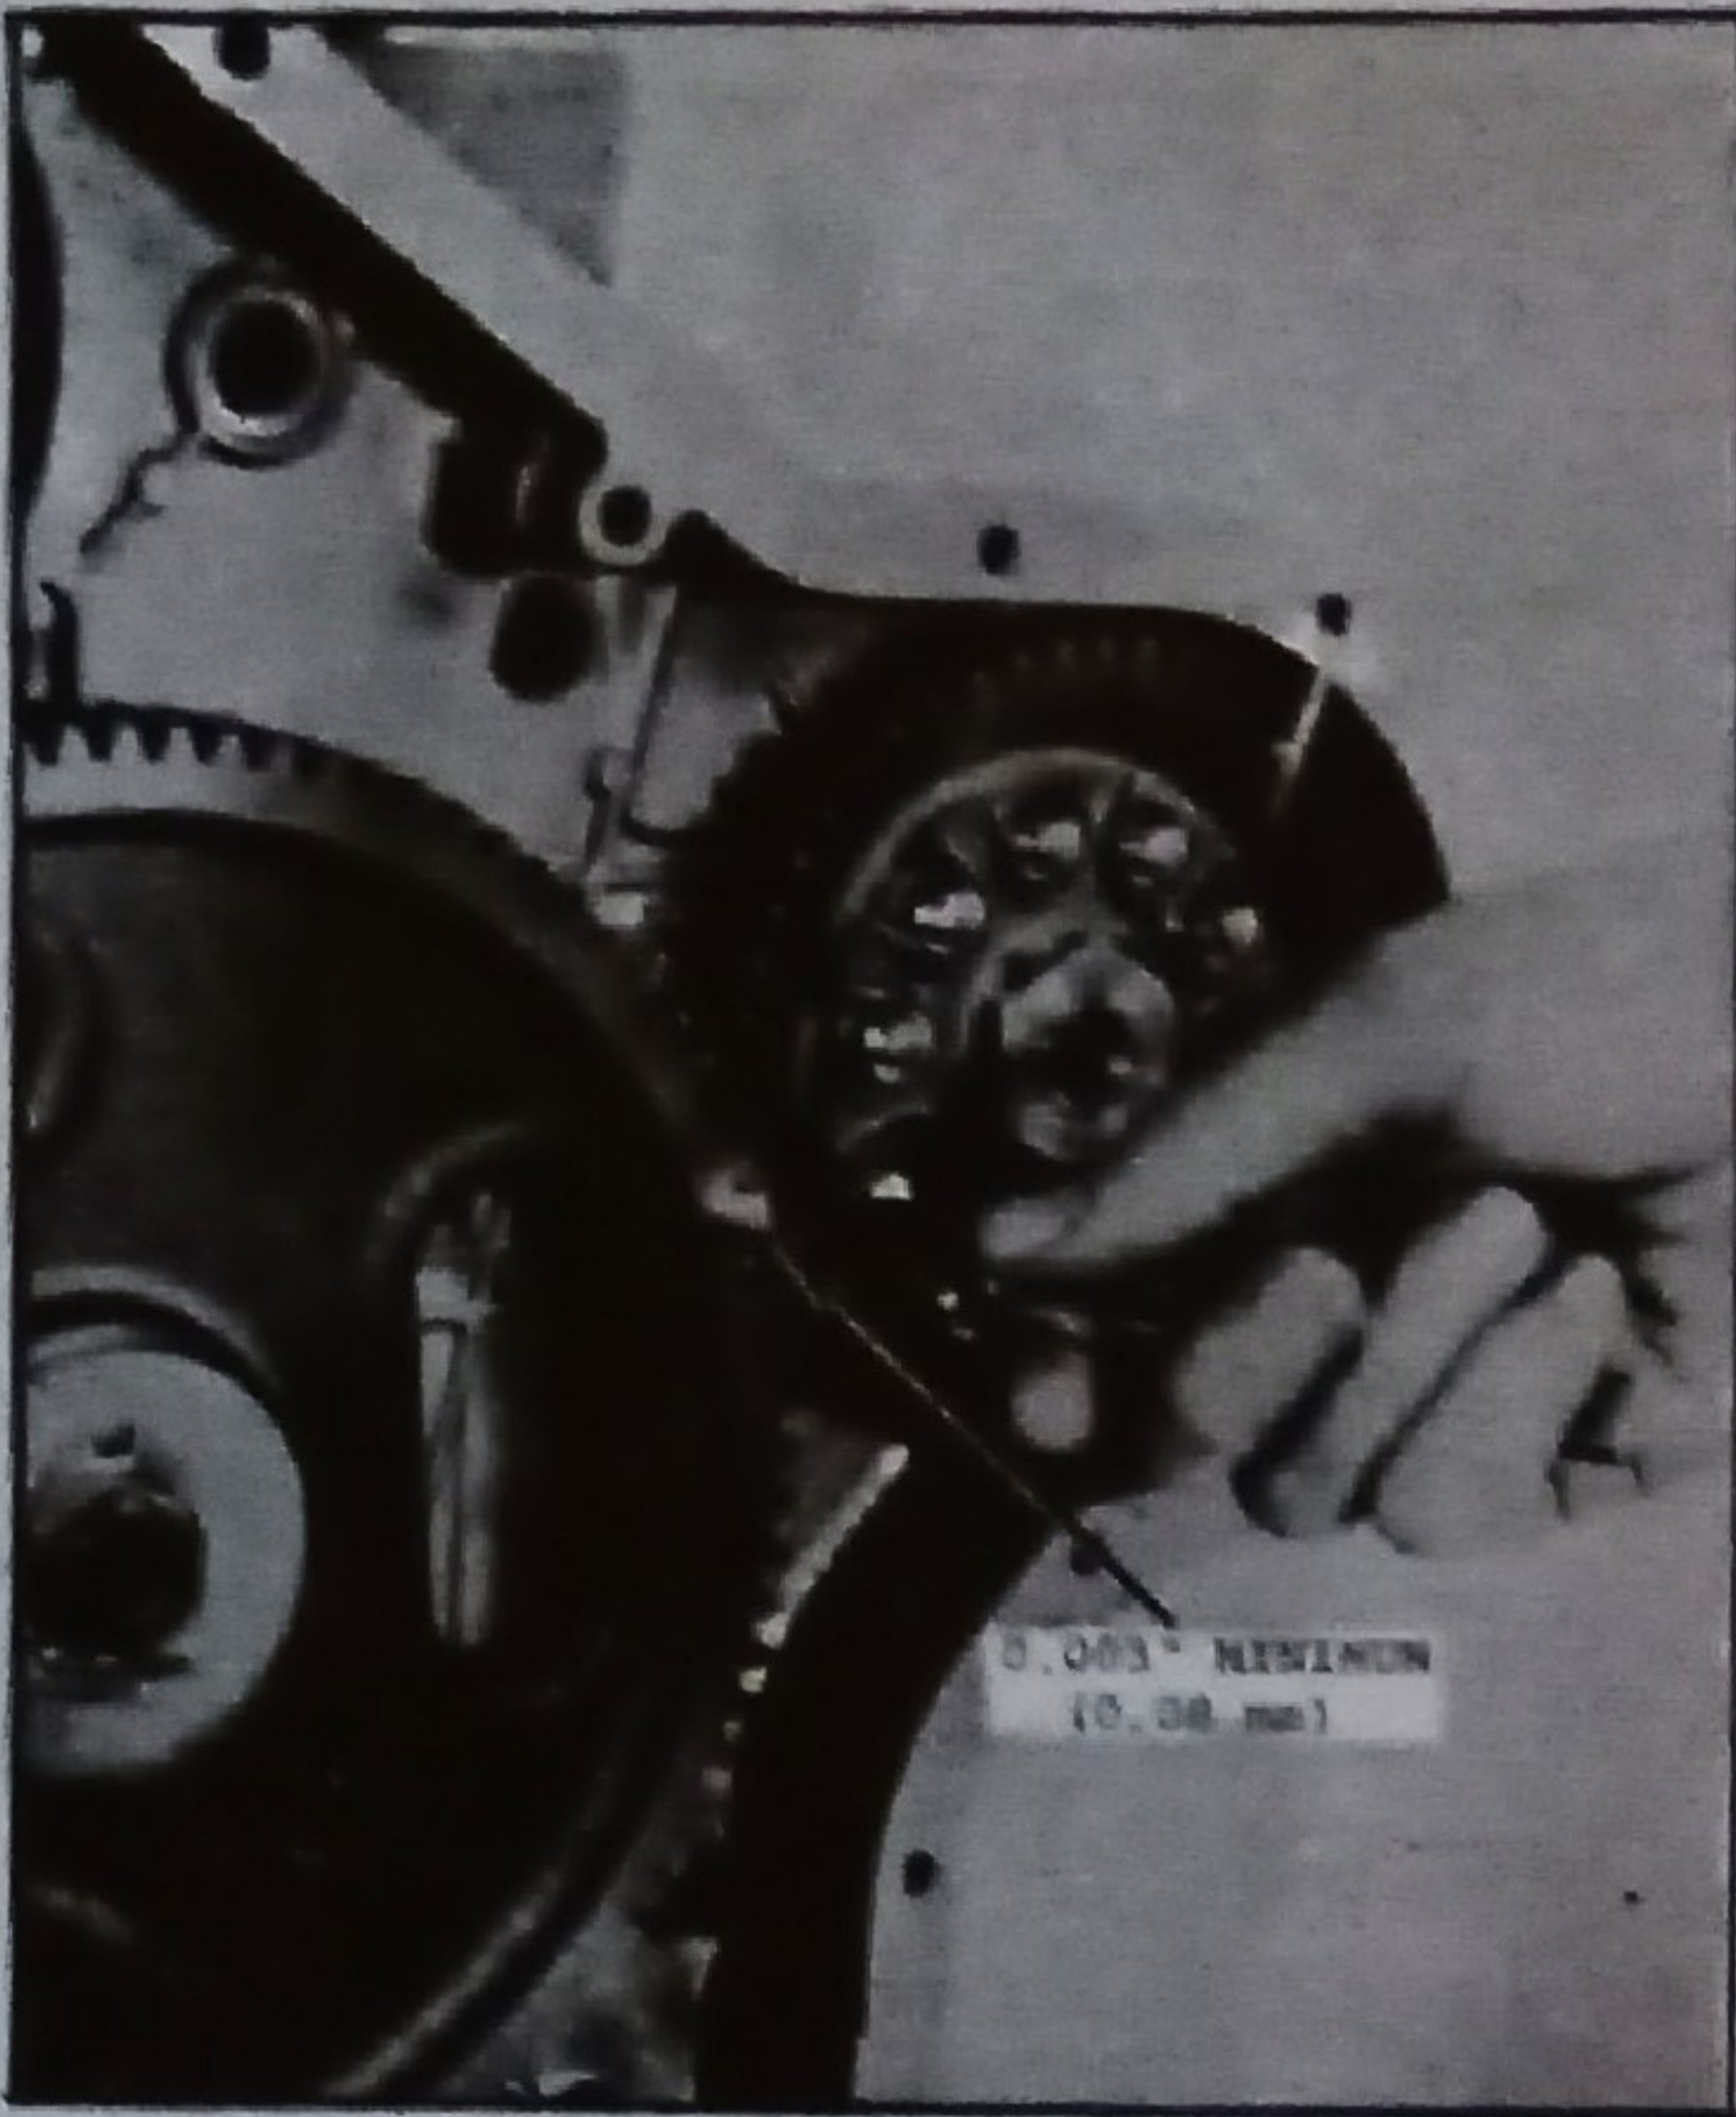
Measuring Timing Gear Backlash Between Idler Gear and its Other Three Mating Gears
